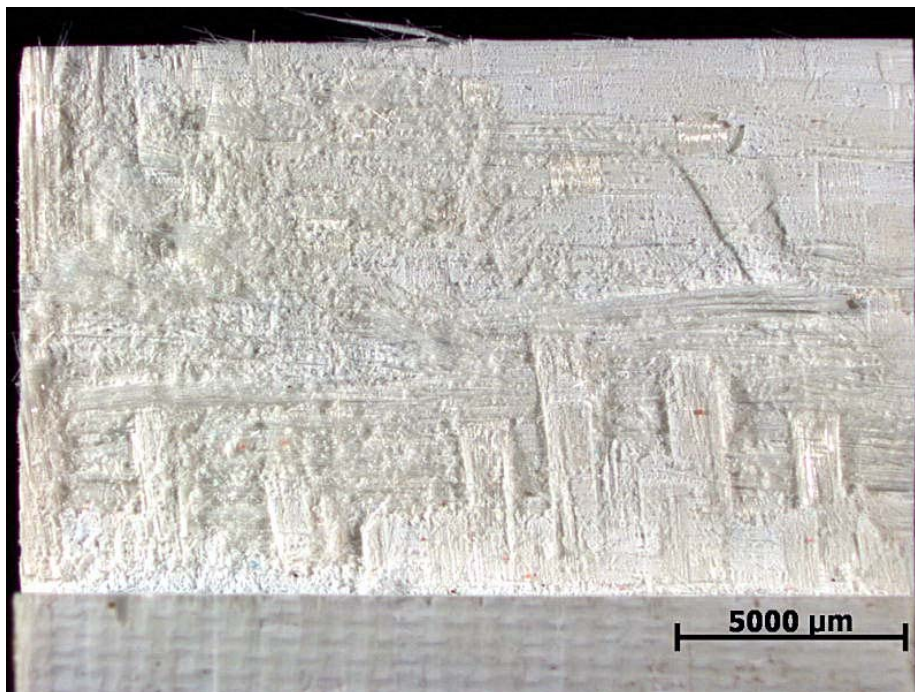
Fracture surface of the N720/A specimen not exposed to steam or 1200°C, Piece B.
